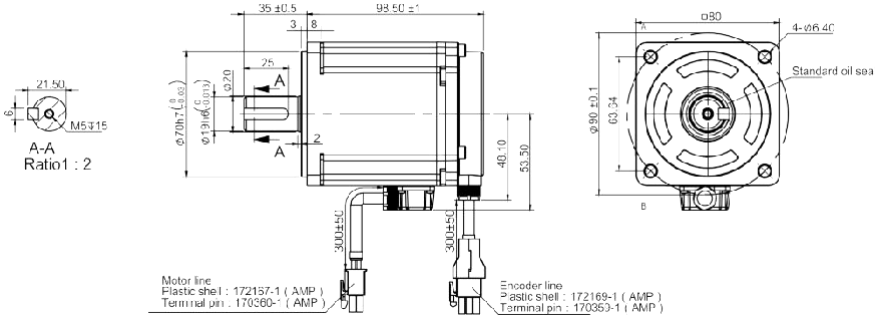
Installation dimension drawing of 80 flange servo motor
